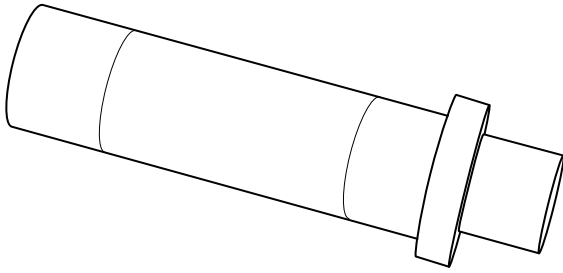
Oil Seal Pressing Tool (332/Y4025)
